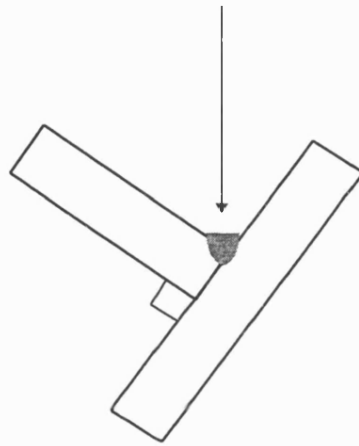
welding in the flat, position,  $\theta = 90^\circ$ .
